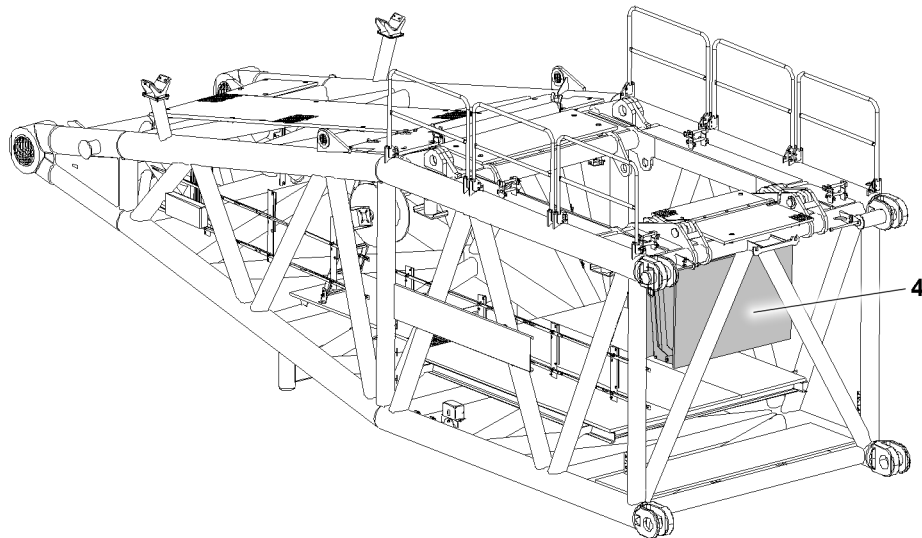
Assembling the assembly pedestal in the operating position — assembly pedestal
